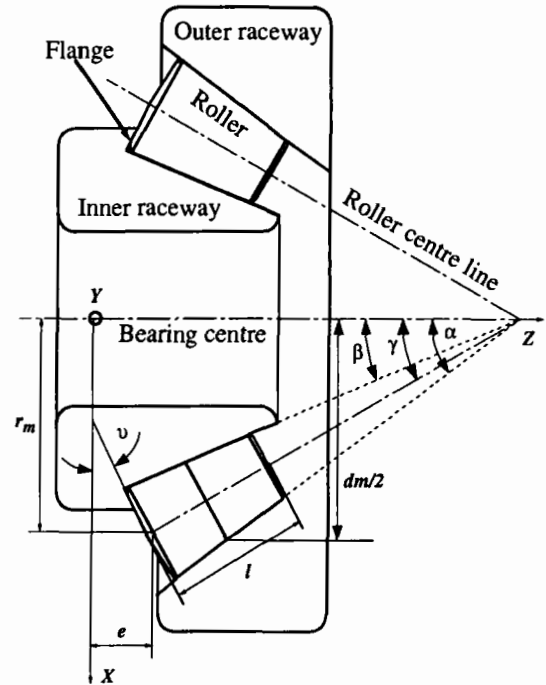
Tapered roller bearing with characteristic geometrical dimensions
